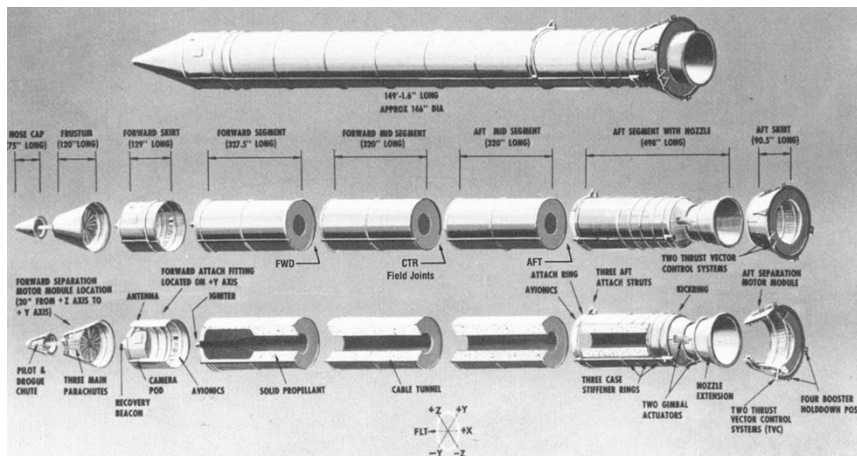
Image showing a single Rocket Booster in an exploded view, that was on board the Challenger Space Shuttle.[7]
